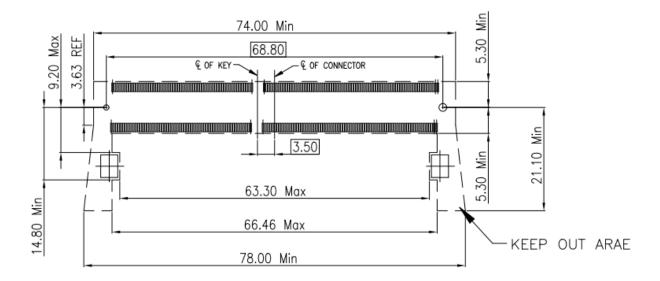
Recommended PCB keep out area for 2309409 (as shown on manufacturer datasheet)
